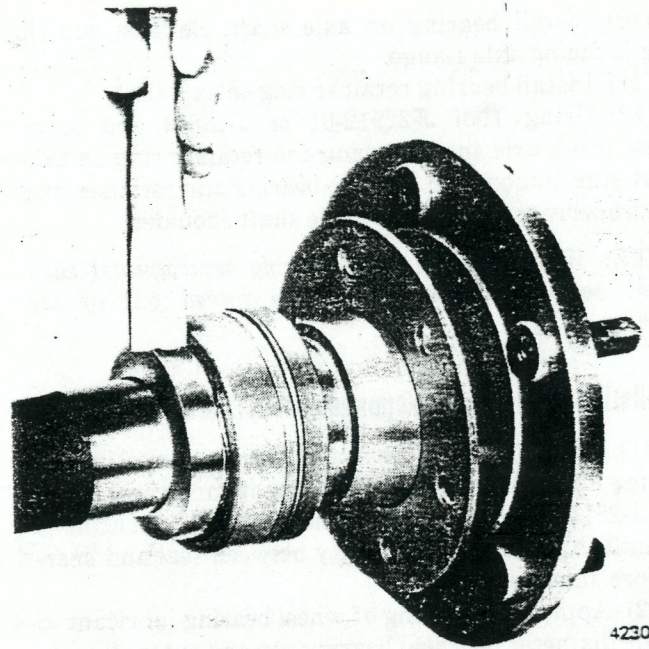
F-25 Notching Bearing Retaining Ring—Cherokee-Wagoneer-J-10 Truck Axle
